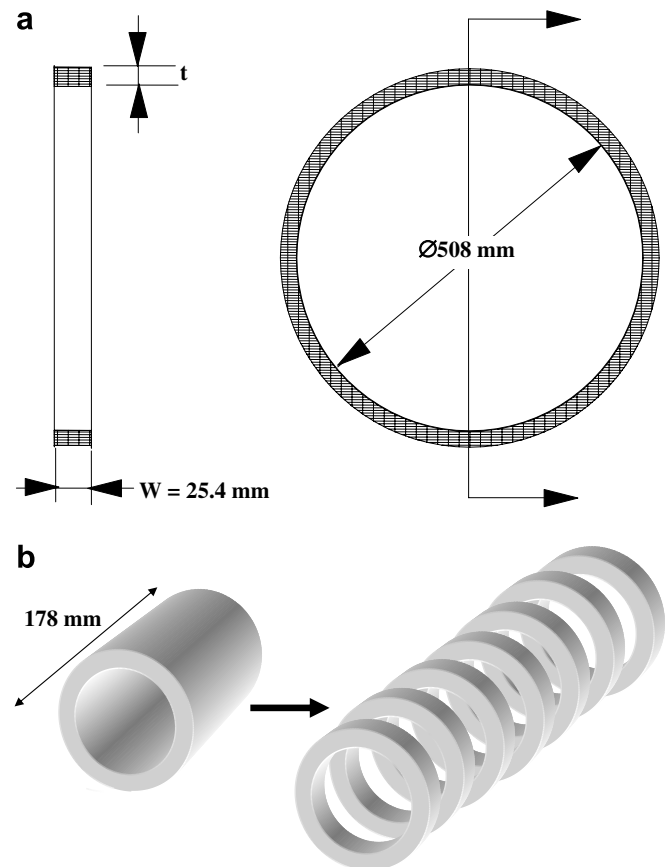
Details of test specimens: (a) dimensions of NOL-ring test unit; (b) schematic of test blank and ring specimens obtained from a blank.
